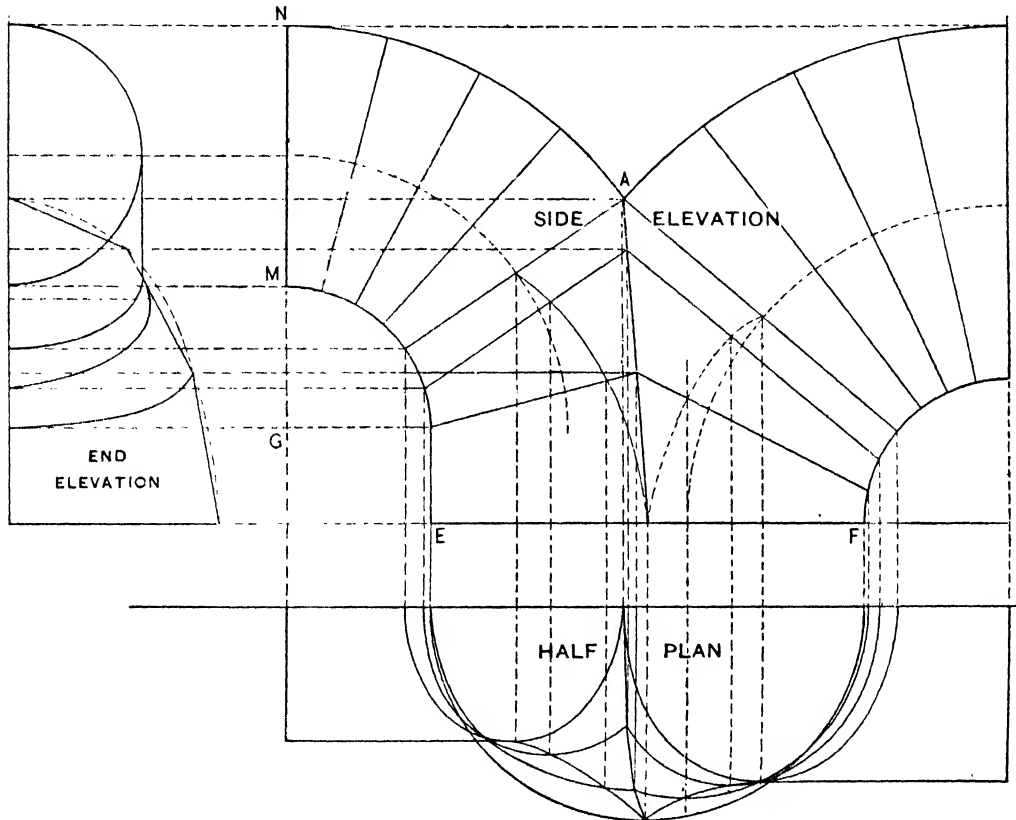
Completed Drawings of Double Elbow Shown in Fig. 88.—One-eighth Full Size
